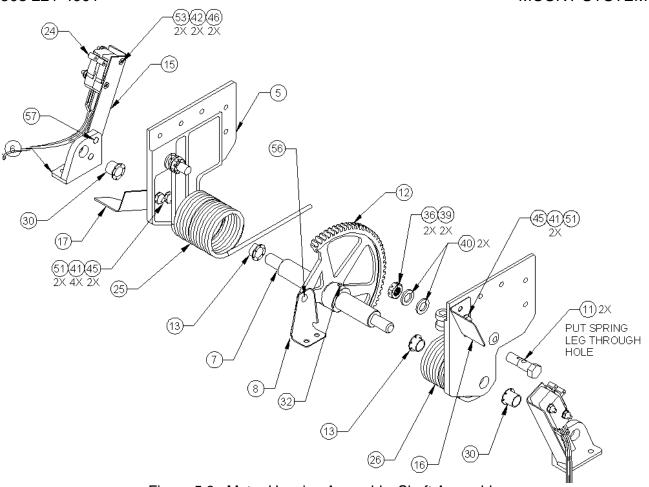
Motor Housing Assembly, Shaft Assembly
